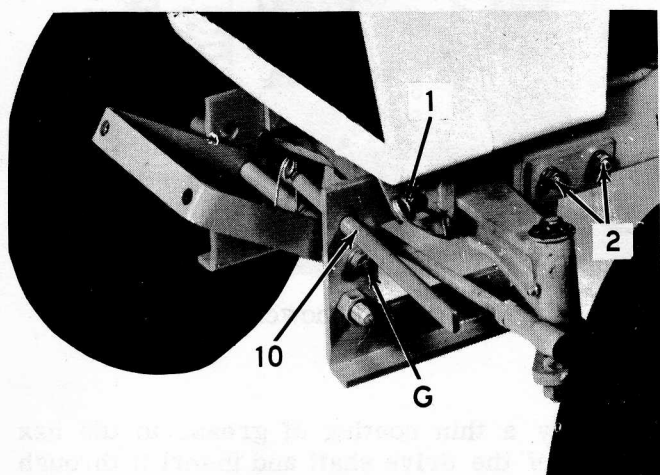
Mounting Bracket for Model 220 and 222 Tractors
